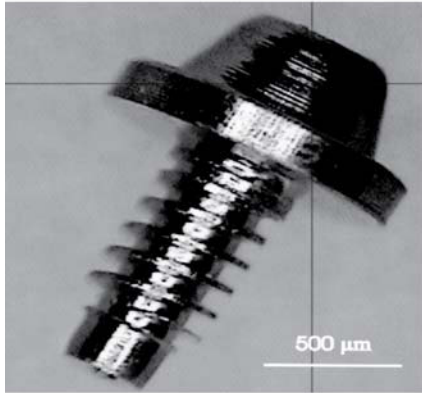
Example of micro-screw with non-ISO dimensions and geometry [9].
